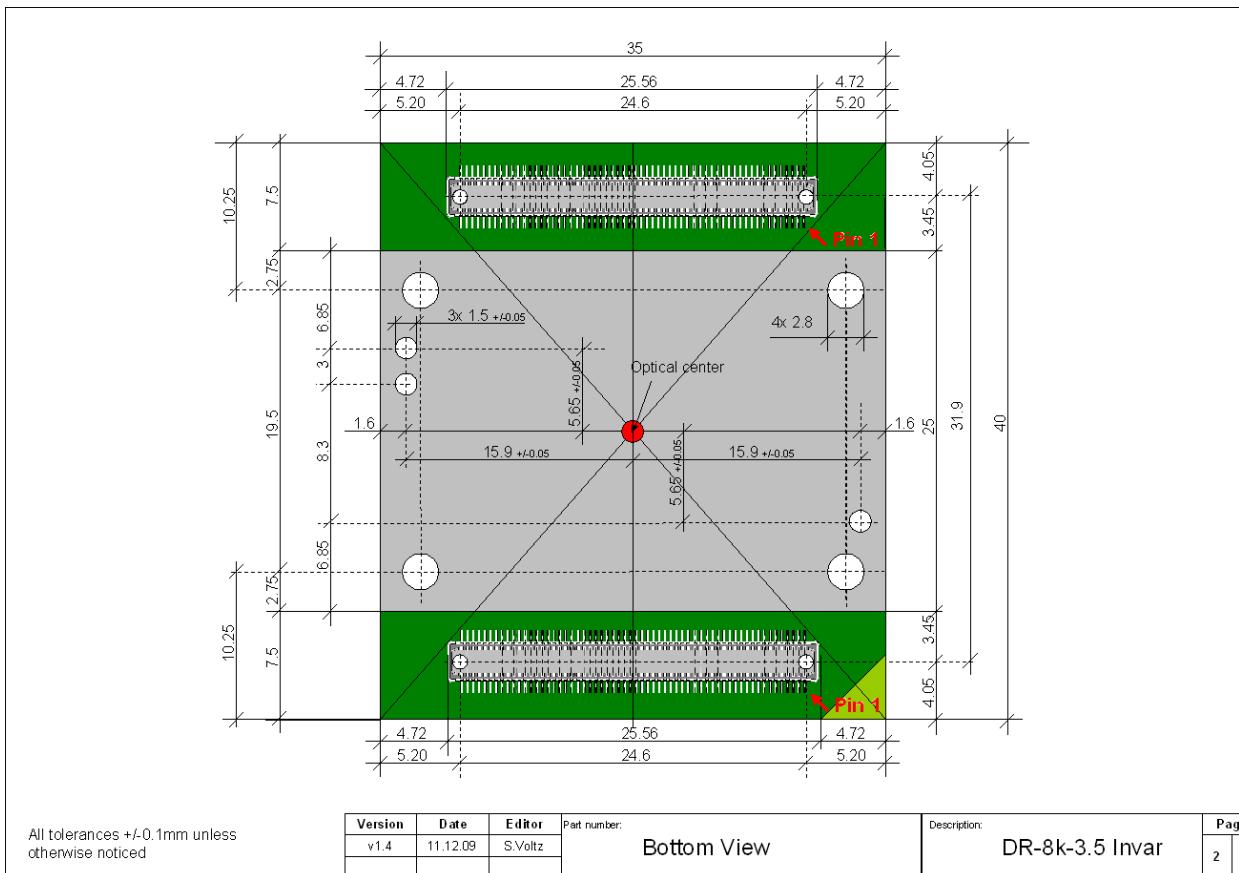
Bottom view DR-8k-3.5& DR-2x4k-7
